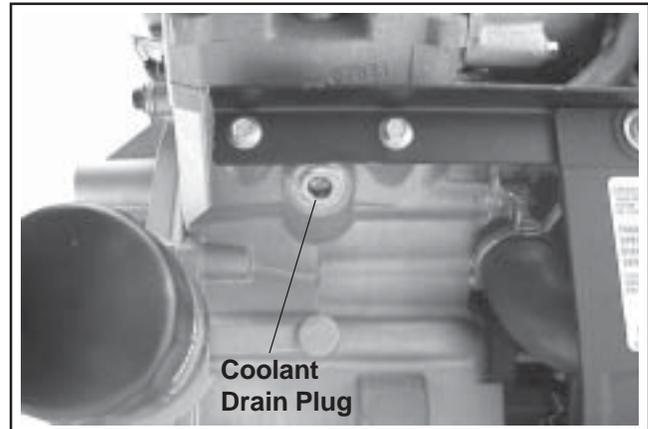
Engine Block Coolant Drain Plug (Some Models).
